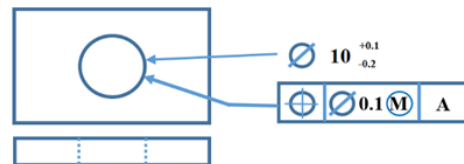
Associating a position tolerance with a (hole) diameter dimension
